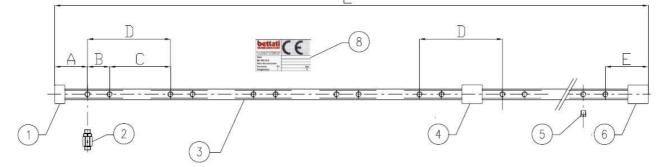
Manifolds for 80L cylinder rack, with directional valves
